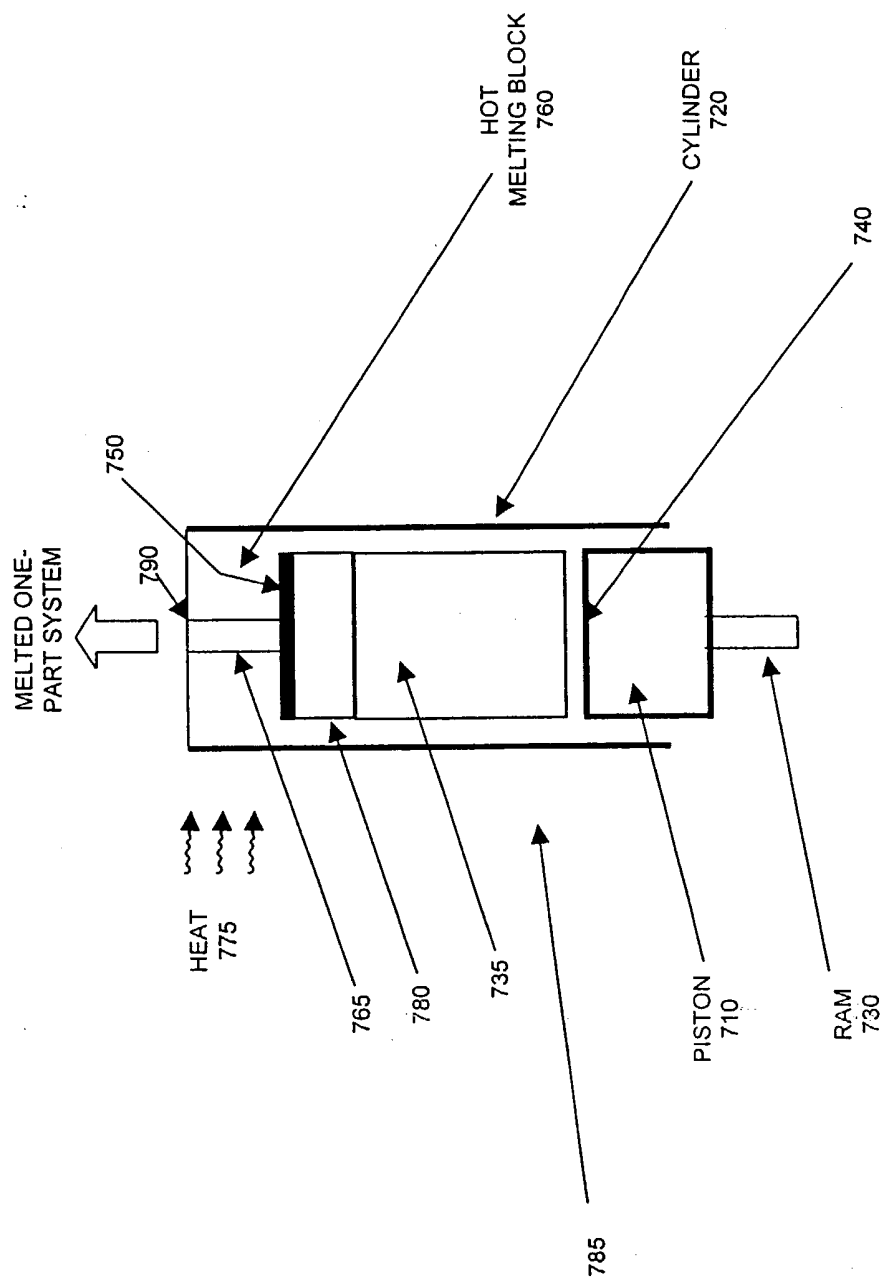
PISTON TYPE MELTER FOR MELTING THE BLEND MATERIAL
